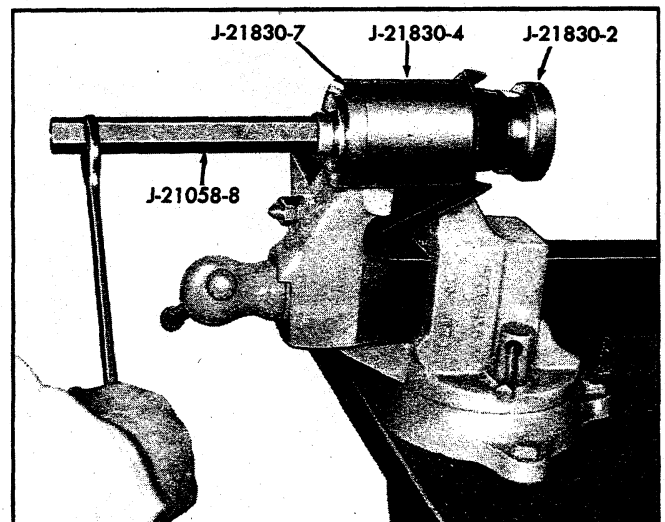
Upper Control Arm Bushing Removal (Chevrolet)
